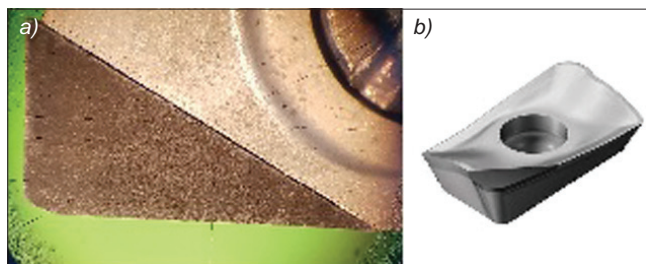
PCD10 cutting insert: a) microscopic view of the insert corner, b) insert visualization [12]
